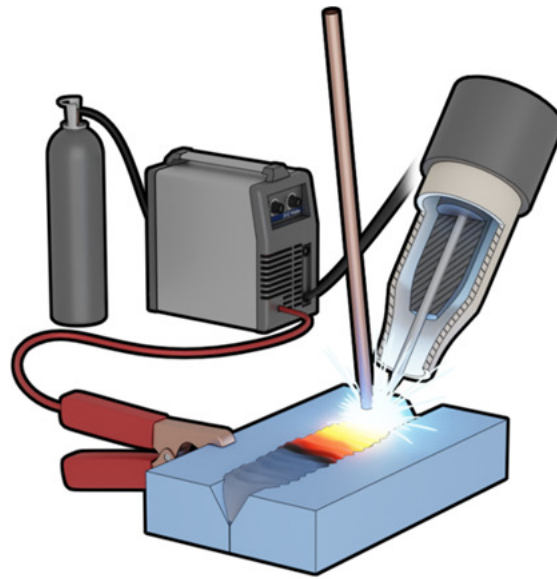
Representing the TIG Welding process [Manufacturing Guide].
